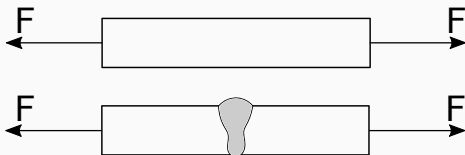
Continuous plate (top) and welded plate (bottom)
